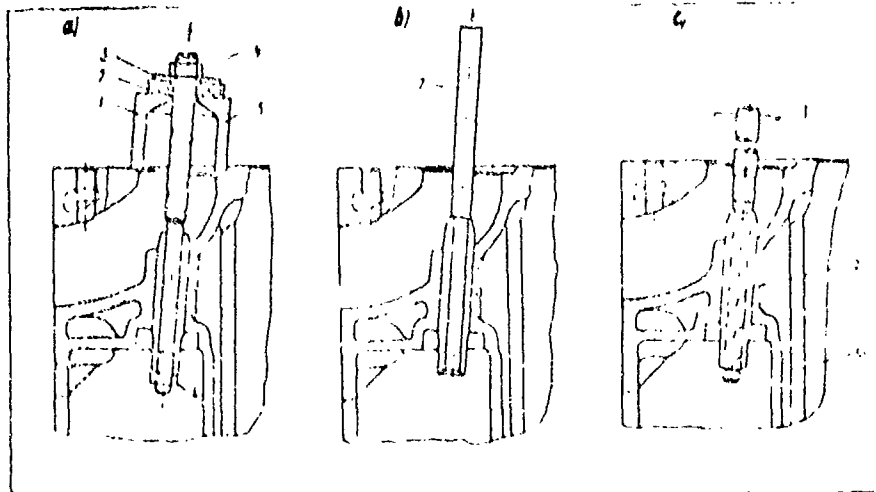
Changing valve guides: a) pressing guide out b) pressing guide in c) reaming guide
